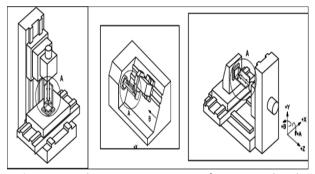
Typical measurement set-up for a vertical and horizontal machining centre and a turning centre.
